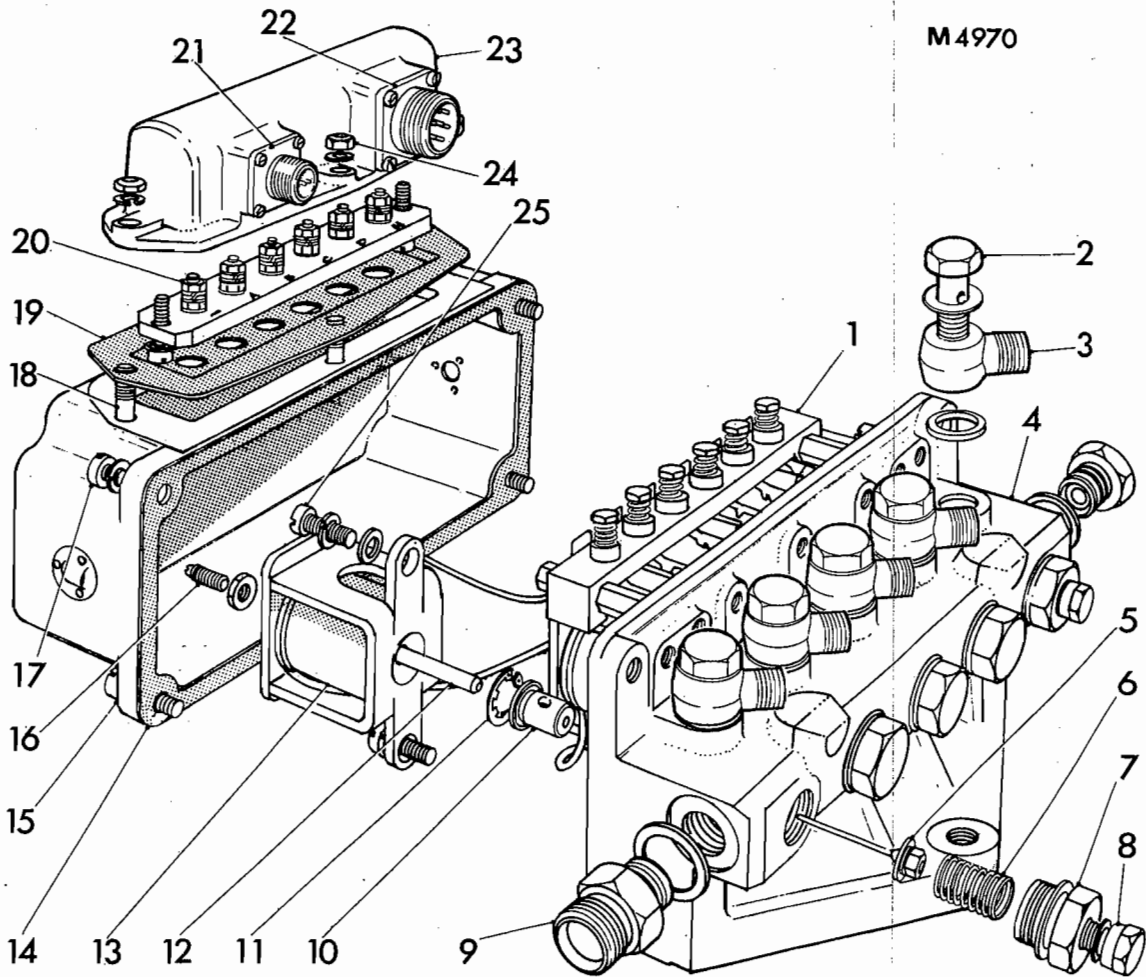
5-WAY ELECTRO-PNEUMATIC VALVE
